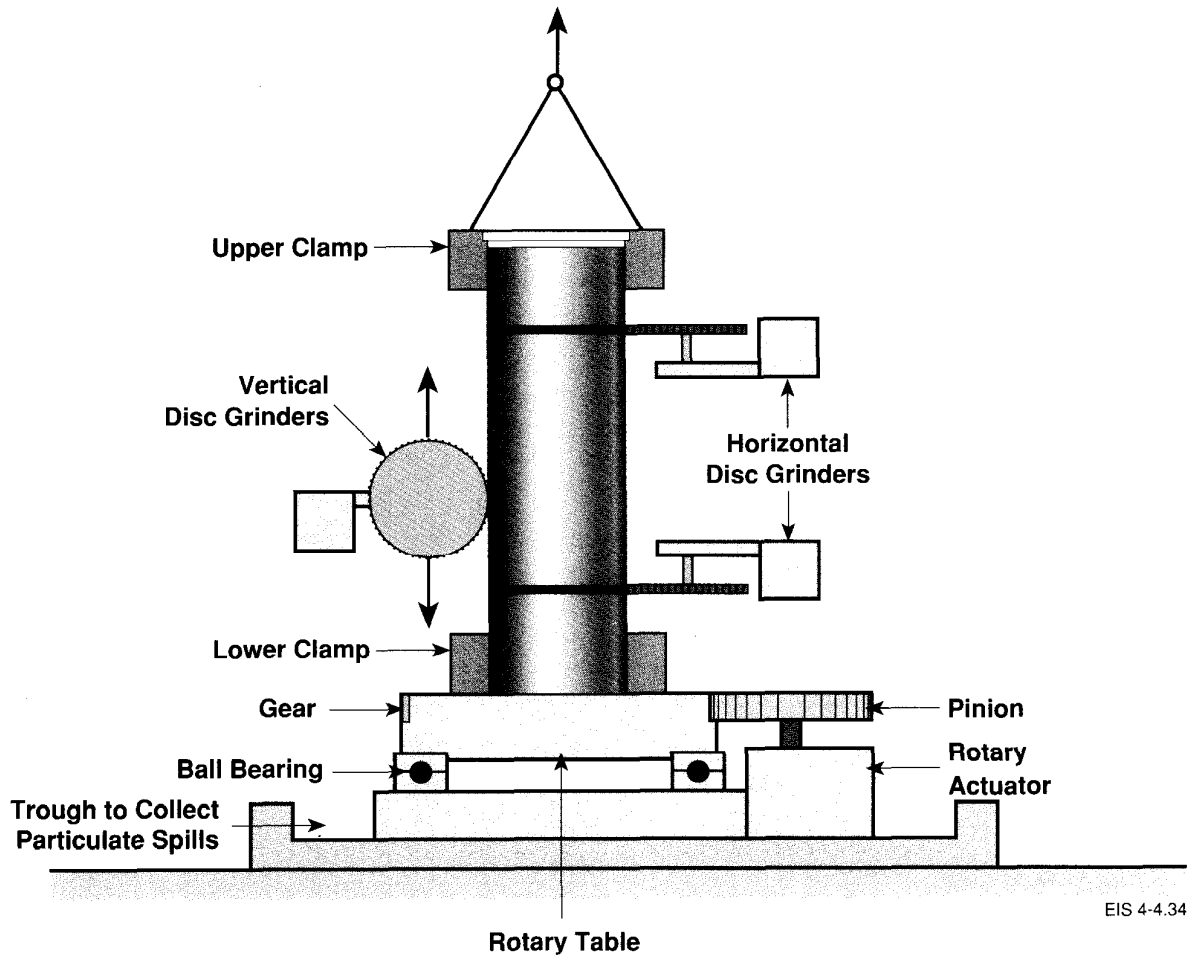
Defective Container Removal Fixture (after AECL CANDU et al. 1992)
